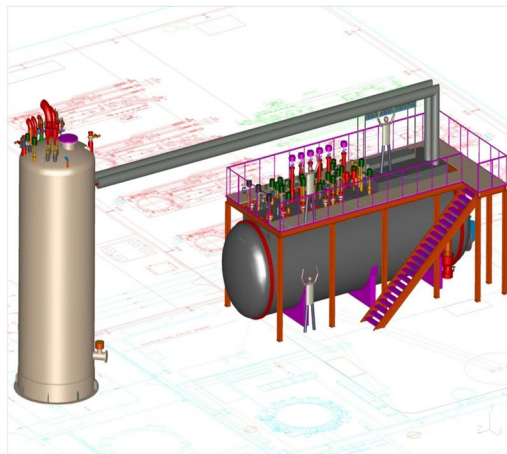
Model of the 4.5K cold box upper and lower vessel sections
